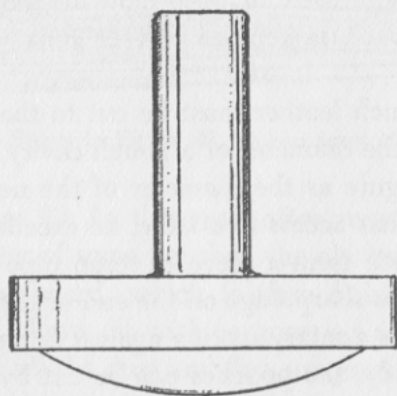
Tool for Imparting the Proper "Dish" to Pouches
